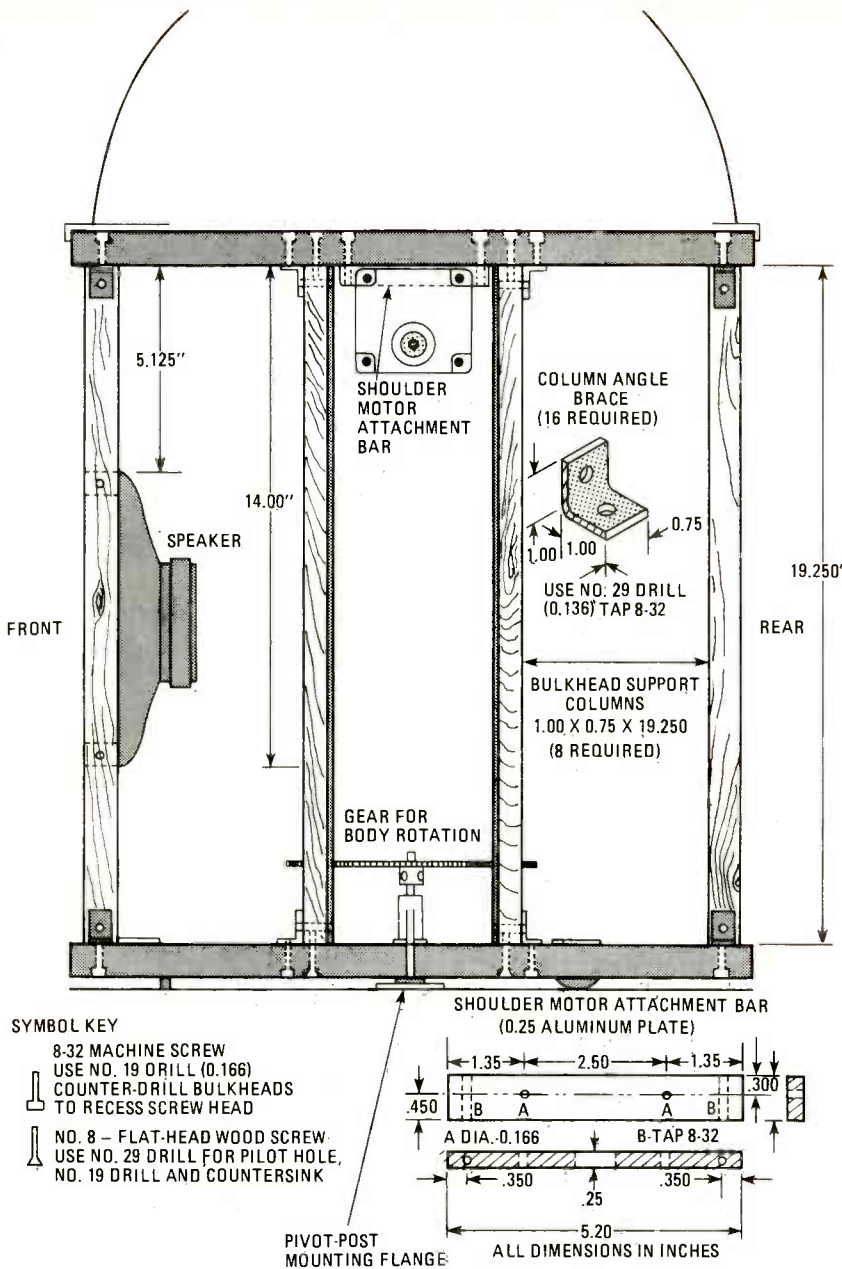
ROBOT BODY supporting structure is of wooden construction. Note pivot-post mounting flange and ball-bearing wheels beneath the bottom bulkhead.
